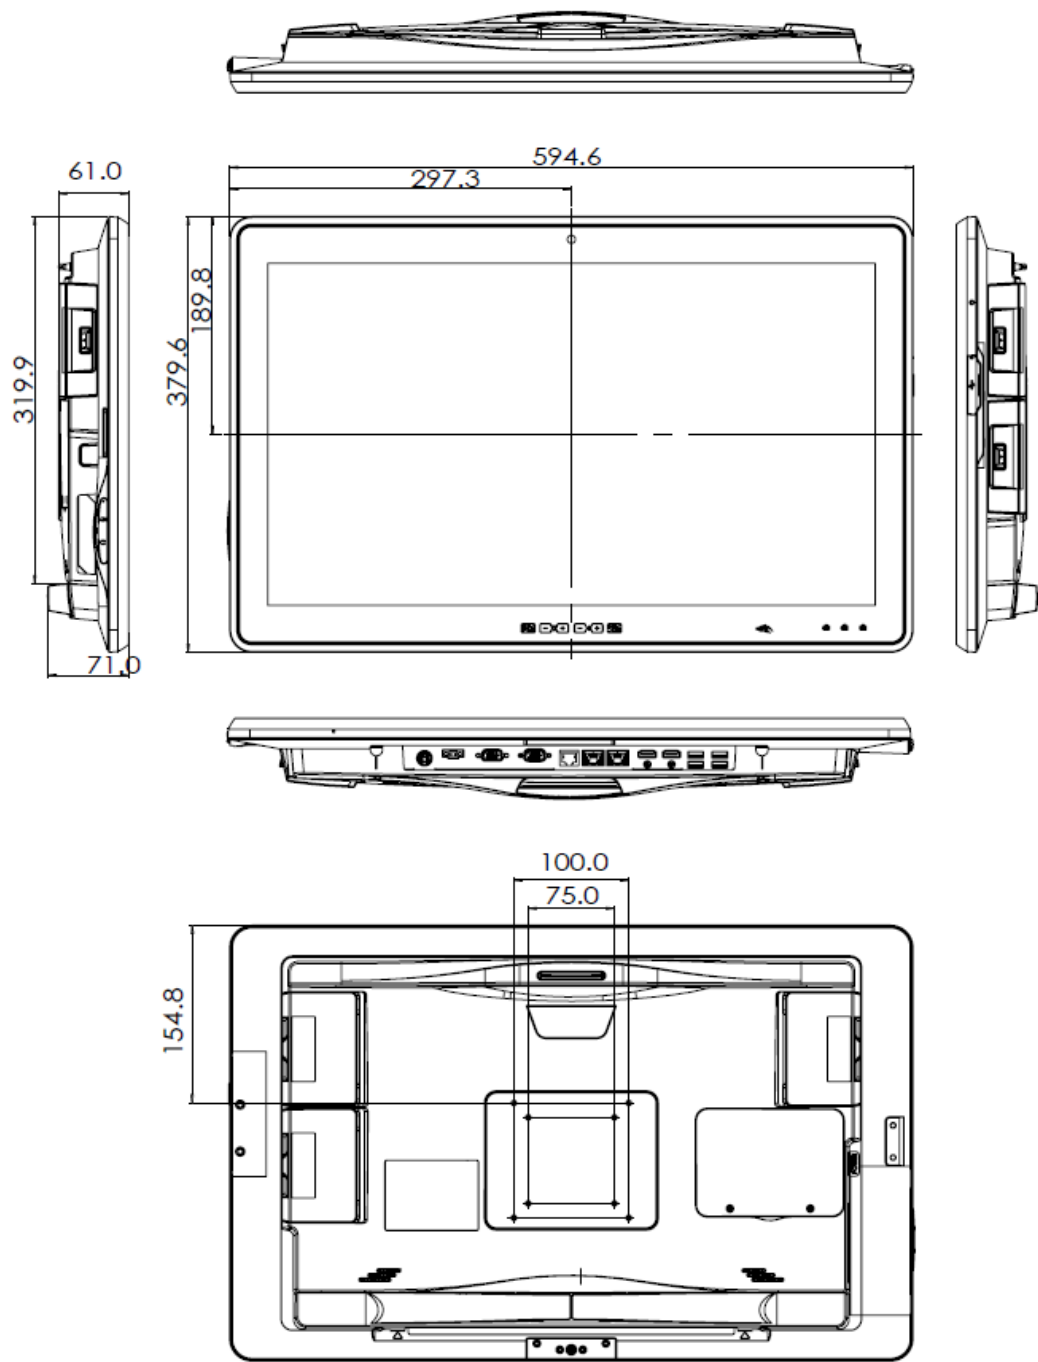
POCm-W24C-RPL Dimensions (mm)
